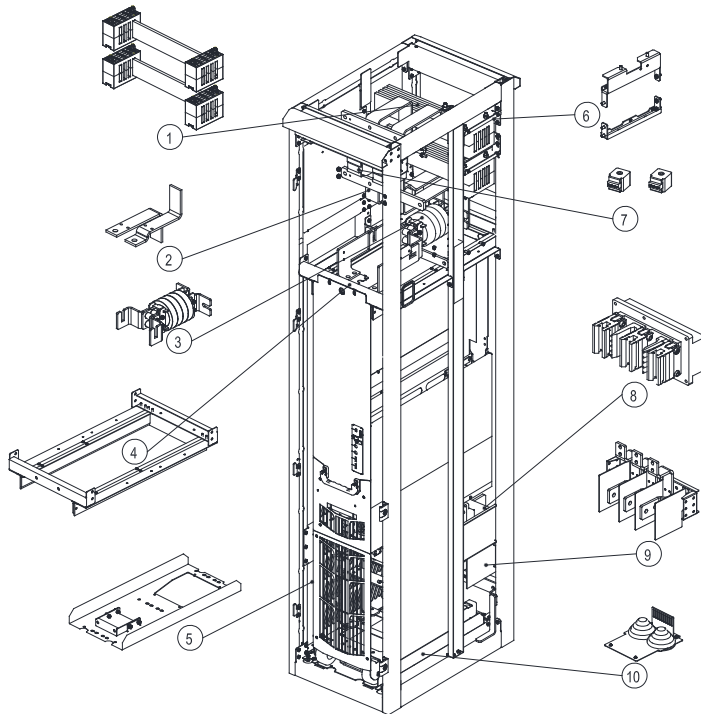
H8-400 mm Cabinet Installation (fuse only)
